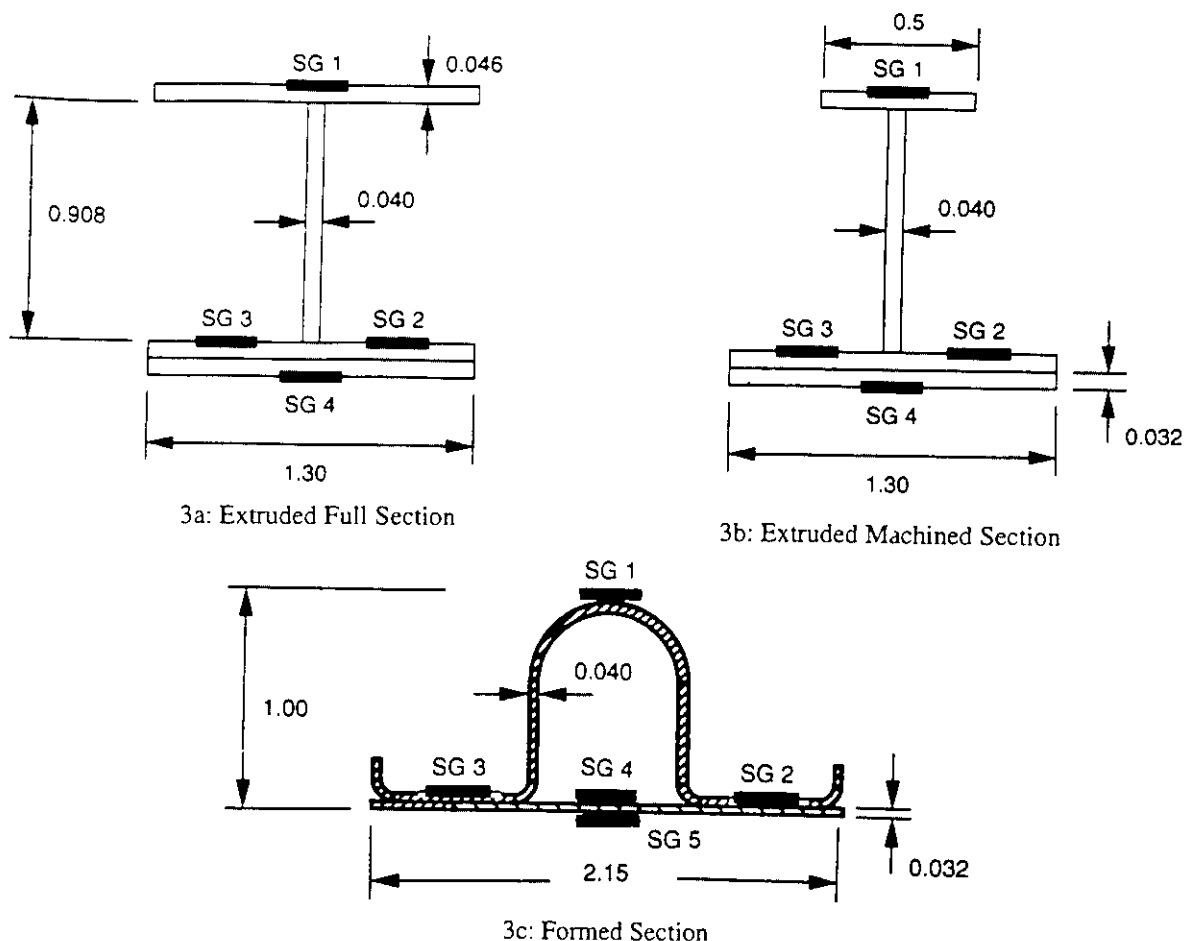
Short Column Crippling Test Specimen Cross-Sections
